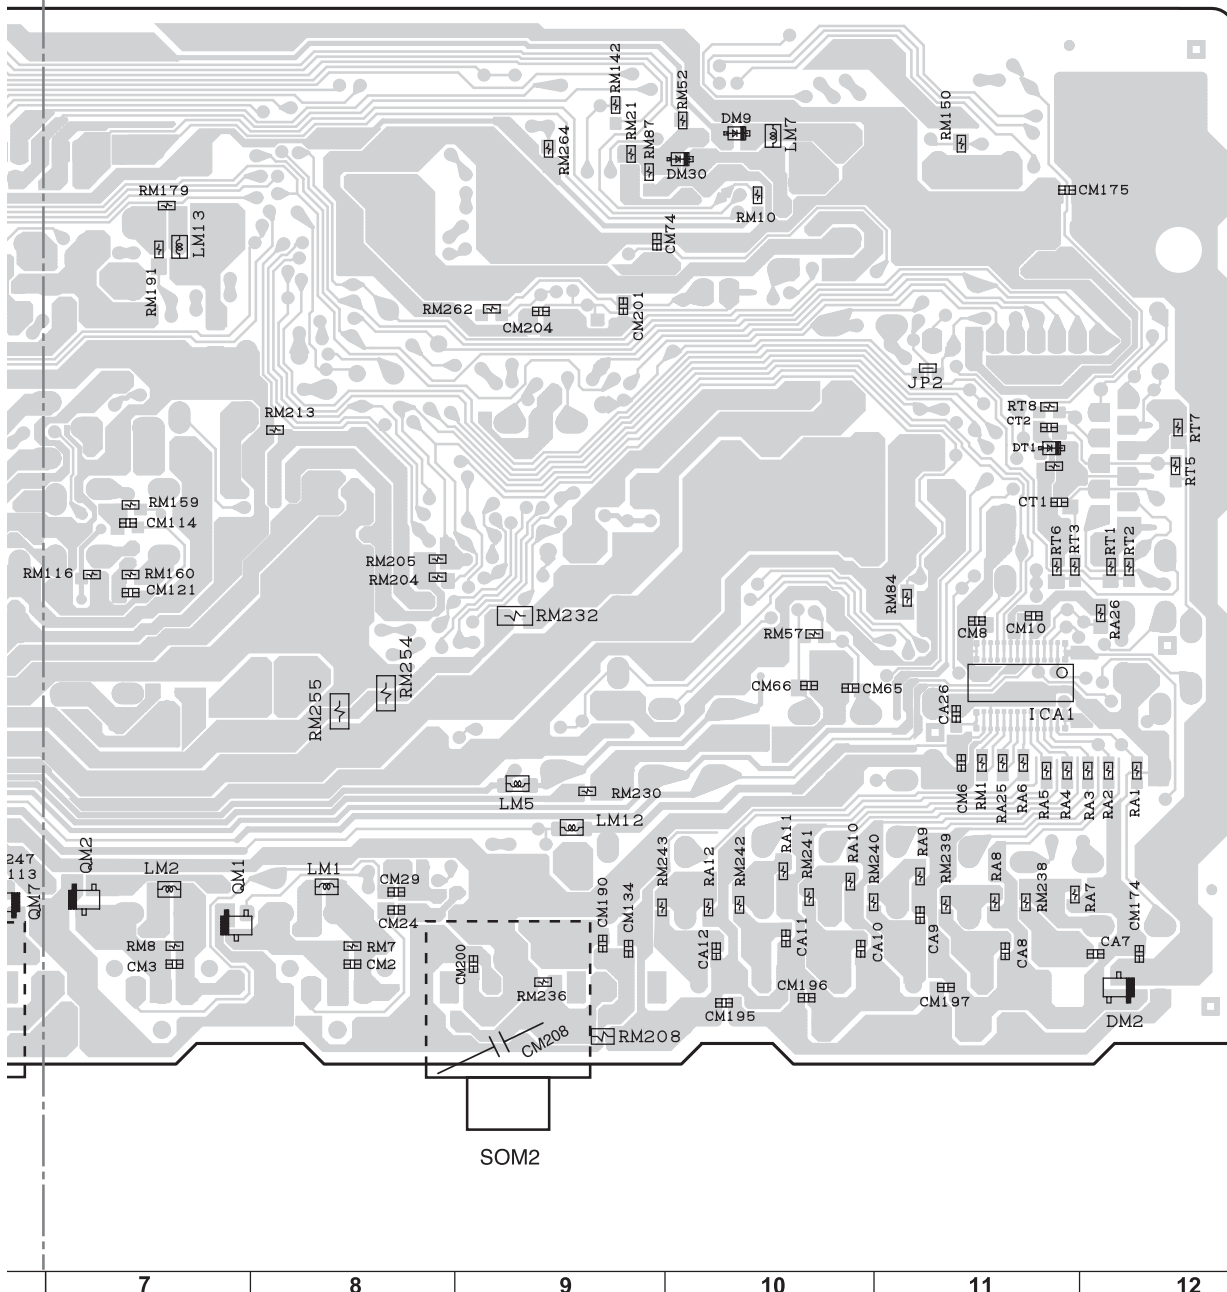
WIRING SIDE OF MAIN PWB (BOTTOM VIEW) (4/15)
